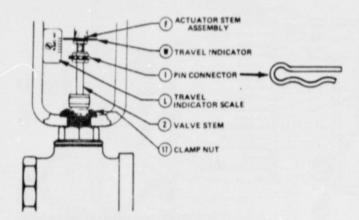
A - VALVE STEM ATTACHMENT (Sizes Through 2" with 30 Sq. In.)
